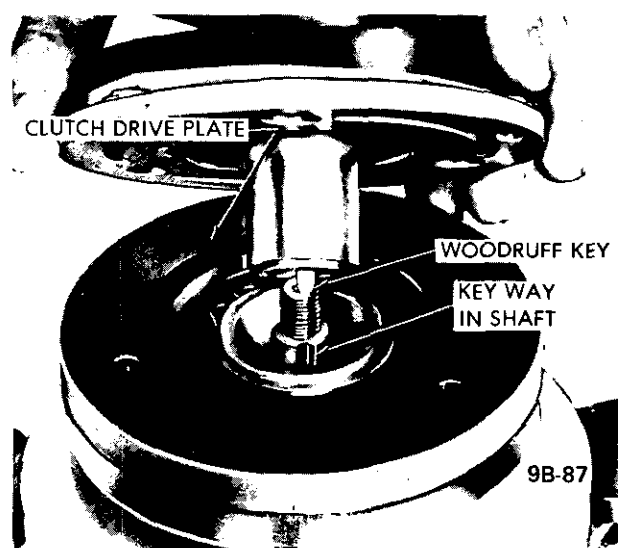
B-113 Positioning Clutch Drive Plate on Shaft
